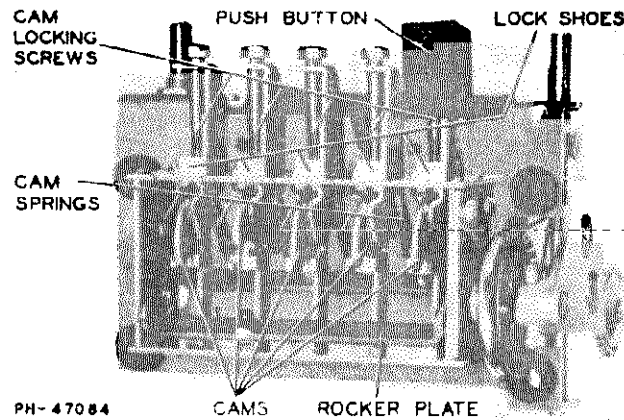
BOTTOM VIEW OF PUSH BUTTON MECHANISM
